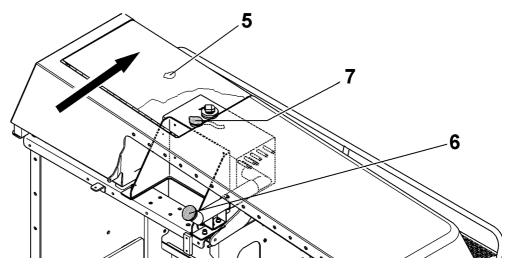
Coolant filler cap 6 and pressure relief valve 7
